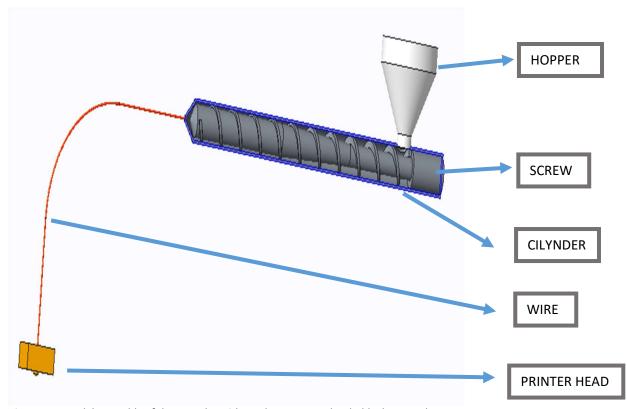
Model assembly of the extruder without the structure that holds the extruder.
